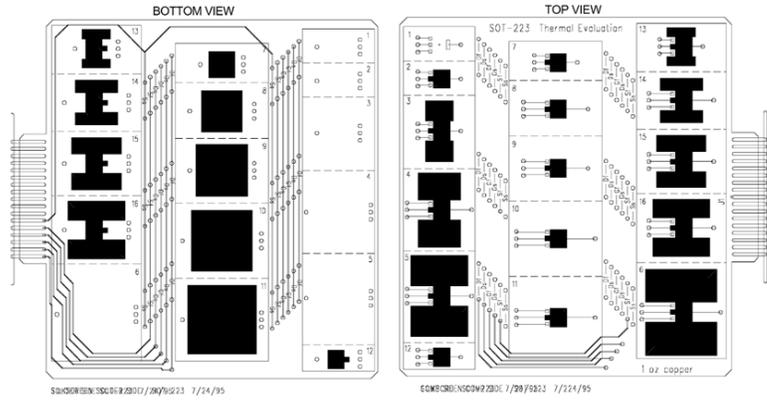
Both Sides of the 4.5" x 5" SOT-223 Thermal Board. Complete scale drawings is shown in Appendix D.
